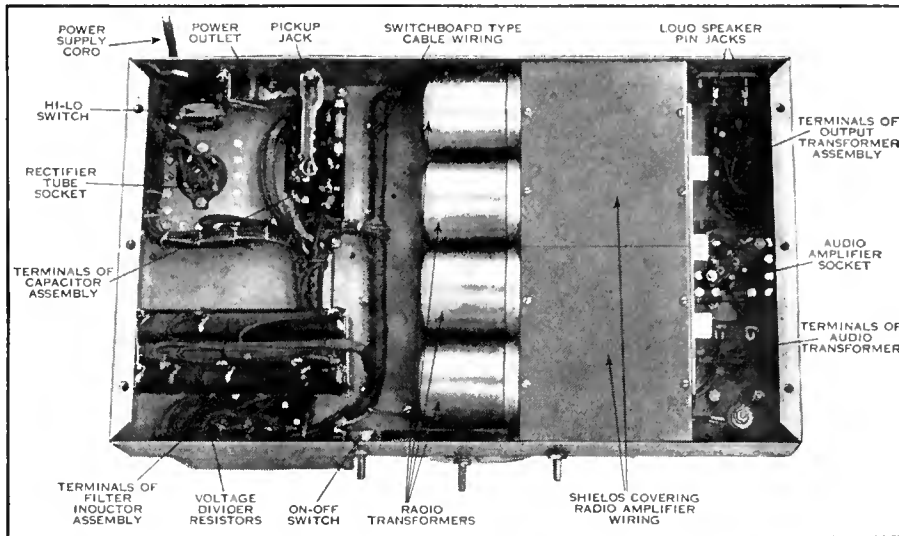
Bottom view of the screen-grid chassis with all shields in place.
